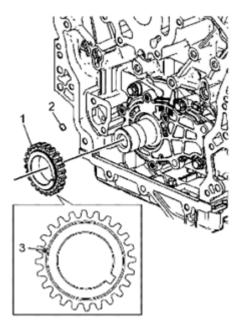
Identifying Crankshaft Timing Sprocket And Key Courtesy of SUZUKI OF AMERICA CORP.
